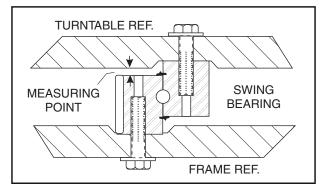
Swing Bearing Tolerance Measuring Point
